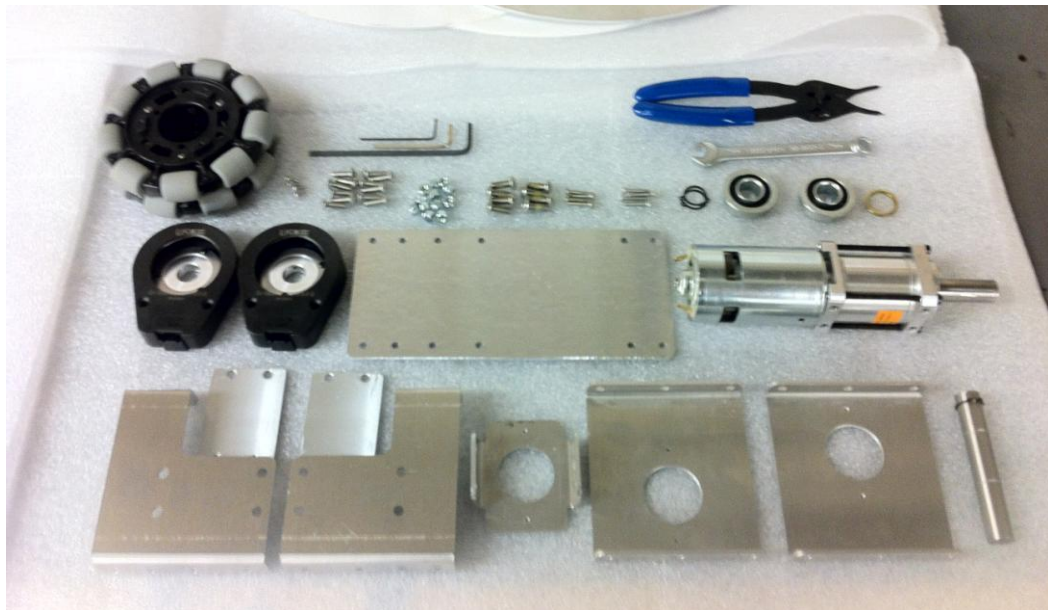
The Set of Parts and Tools Required to Assemble the Module
